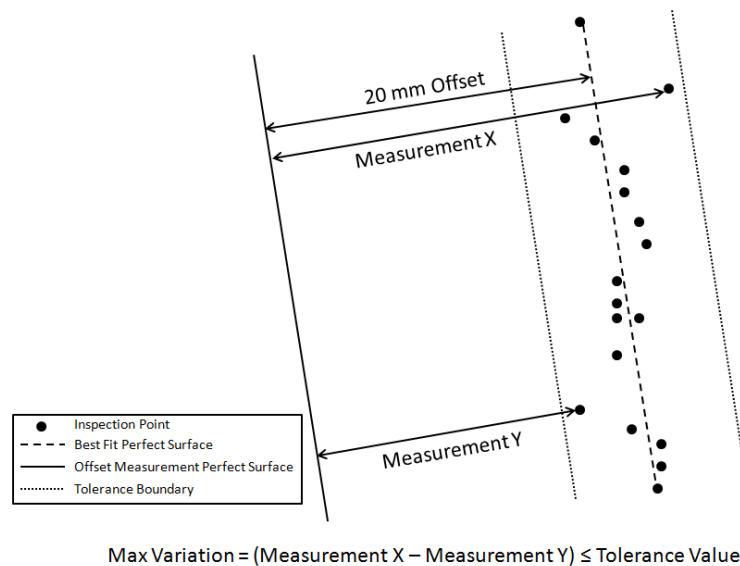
Schematic of the perpendicularity inspection process with an offset plane.
